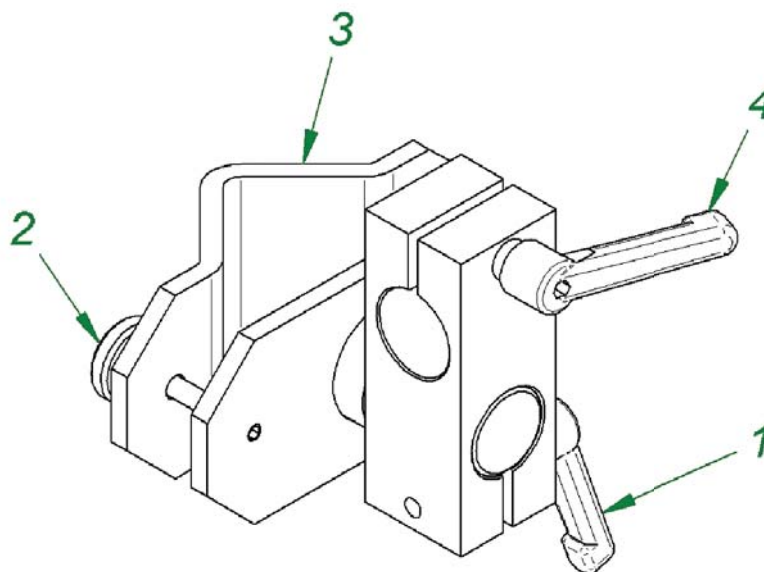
Angular torch holder design: 1 – handle securing torch angle, 2 – knob securing torch into holder, 3 – torch holder, 4 – handle securing follower arm
